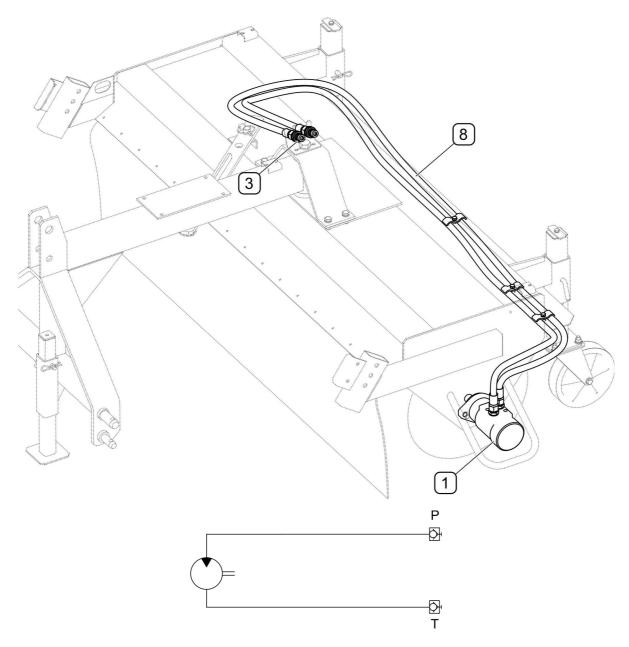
A Design of hydraulic system of ZM-1600-04 sweeper
